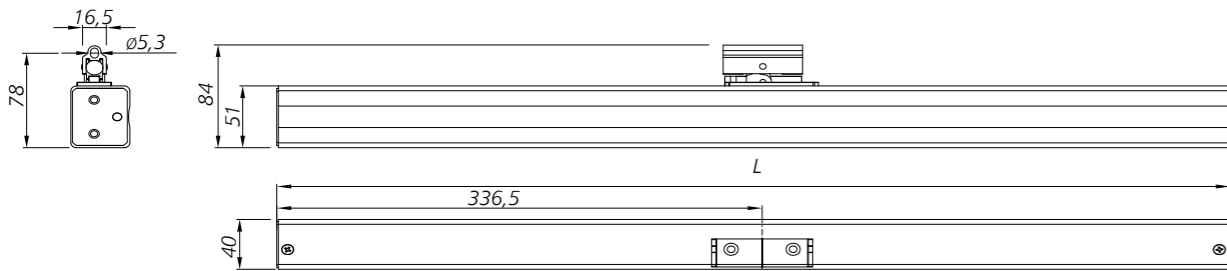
Dimensions of HCVA electric chain actuator [mm]
